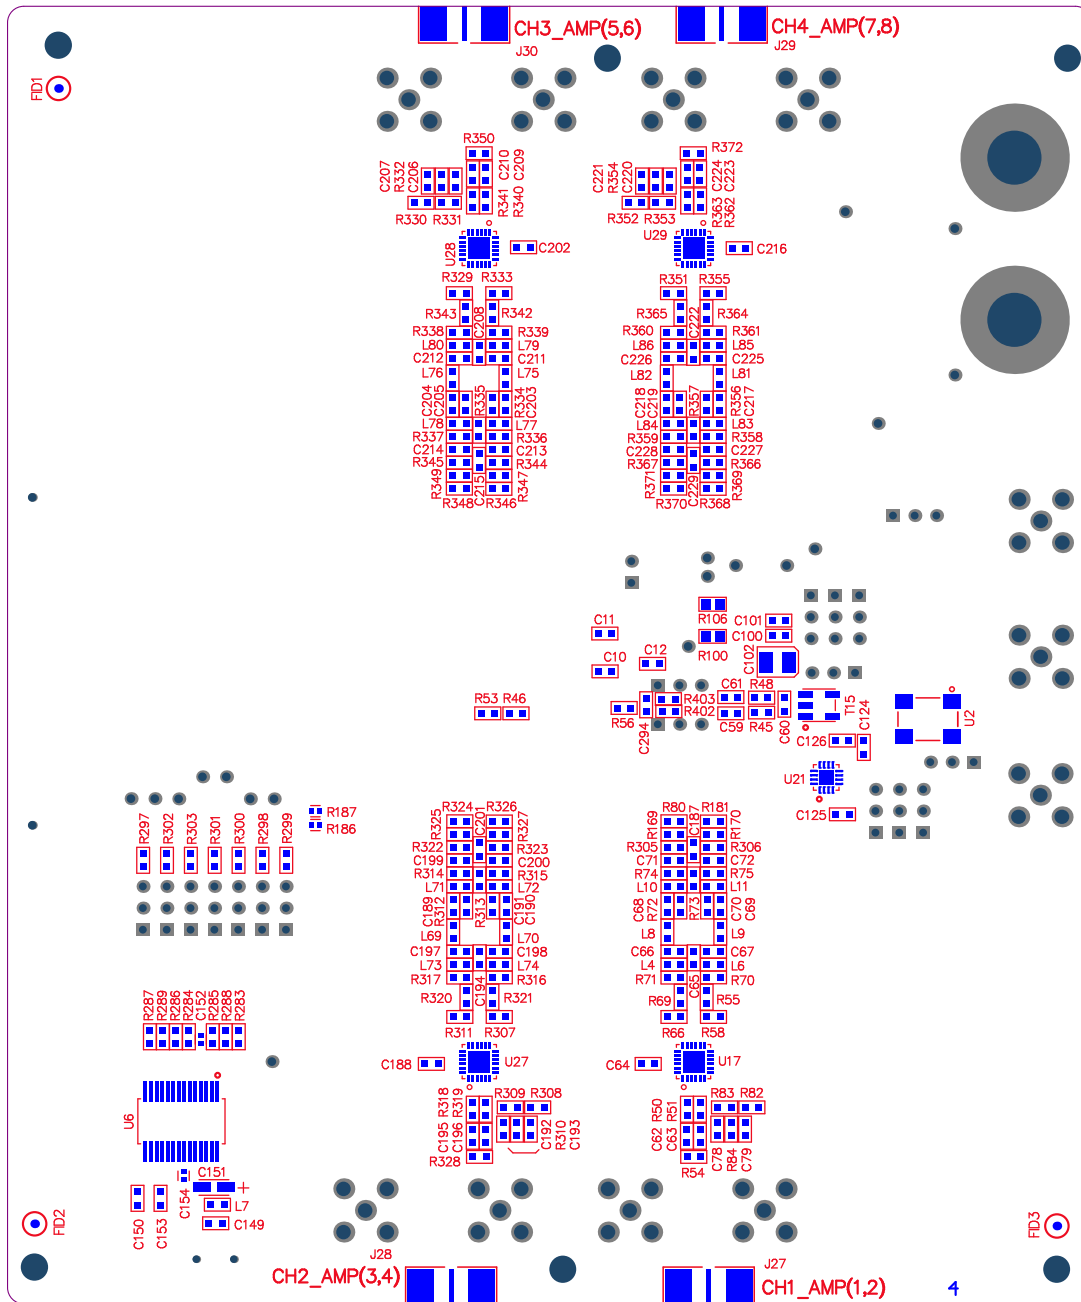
ADS5296 EVM Bottom Layer Assembly Drawing – Bottom View
